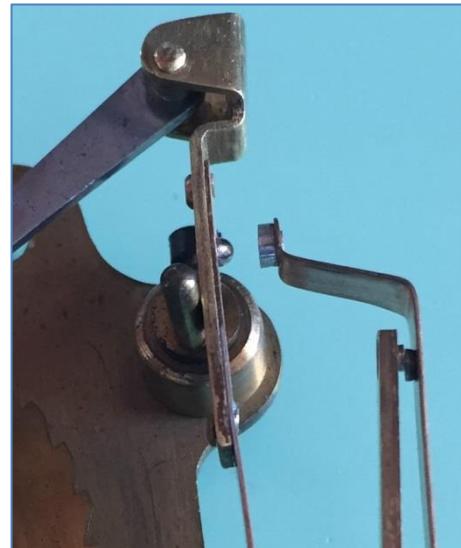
Dial contact spring assembly after repair, with new platinum contacts
